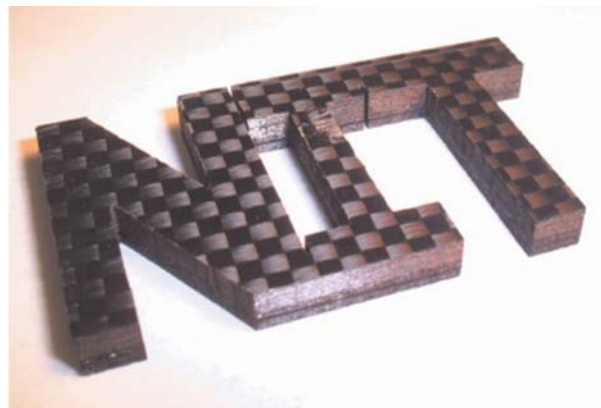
C-FRP material trimmed by wire-electrical discharge machine
